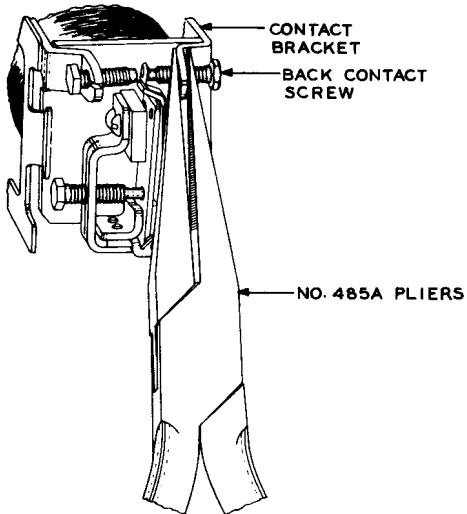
Method of Adjusting Front End of Contact Bracket
